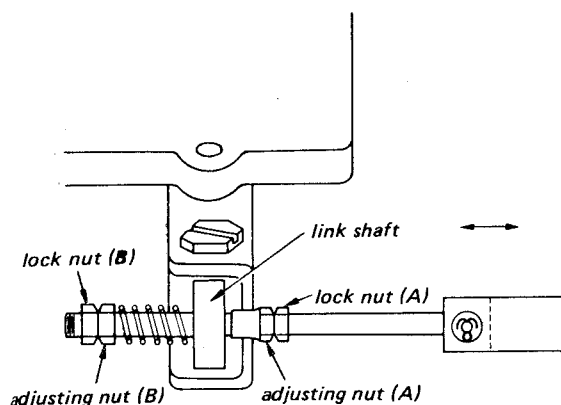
Pinch roller pressure adjustment (1)
